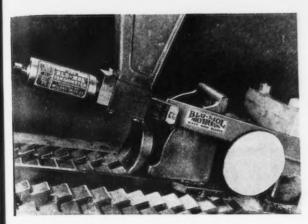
FIG. I—This spring loaded Tensiometer serves to maintain constant tension on hacksaw blades, and reduces failures due to improper tension.
